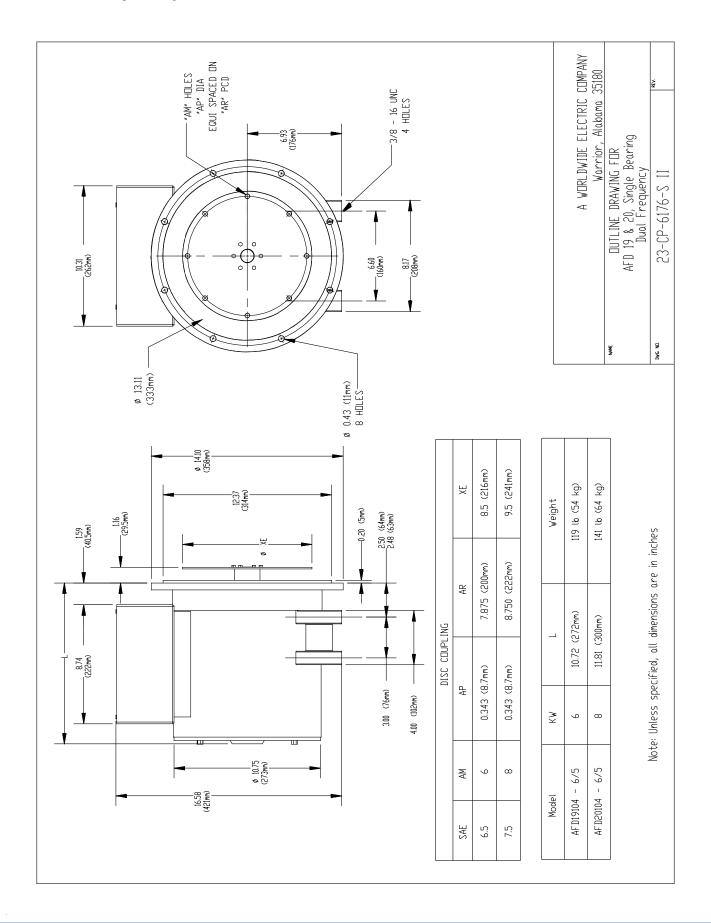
& 20 Single Bearing Dedicated Frequency
